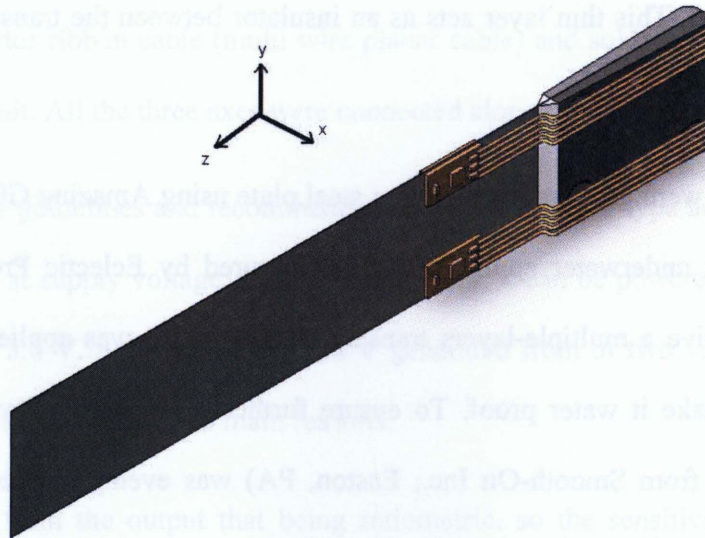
Isometric view showing the installation of the accelerometers with wires on the cantilever plate
